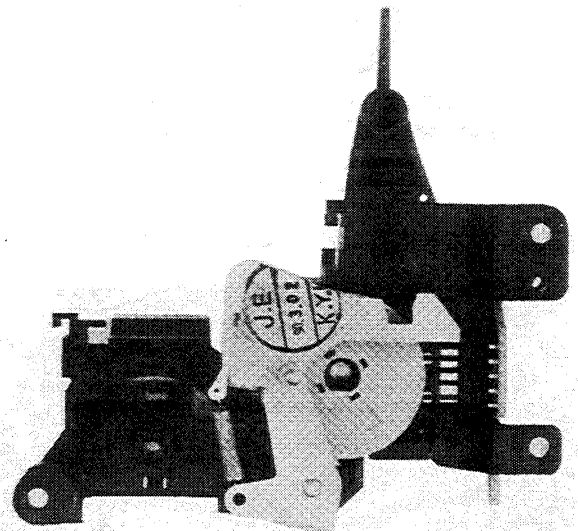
Ass'y Loading Unit Master Cam Gear Assembly
